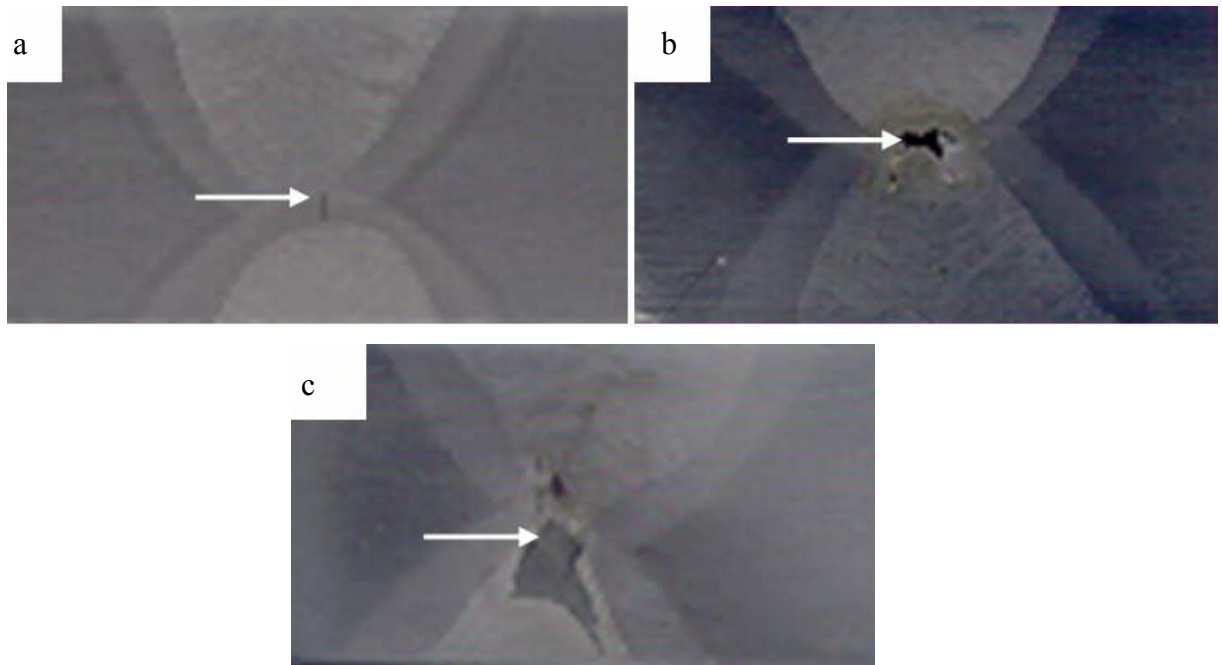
Examples of lack of penetration defect: (a) SA516 weldment produced using 800 A and 15.3 mm/s; (b) A709 weldment produced using 700 A and 12.3 mm/s and (c) A709 weldment produced using 700 A and 15.3 mm/s.
